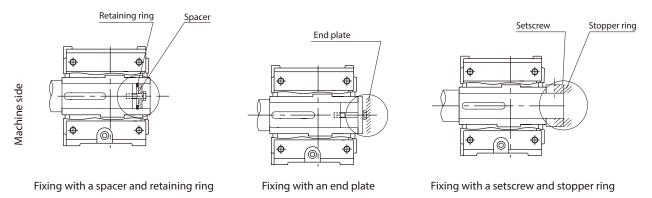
Example of Fixing Method that Prevents the Product from Moving to the Anti-machine Side
